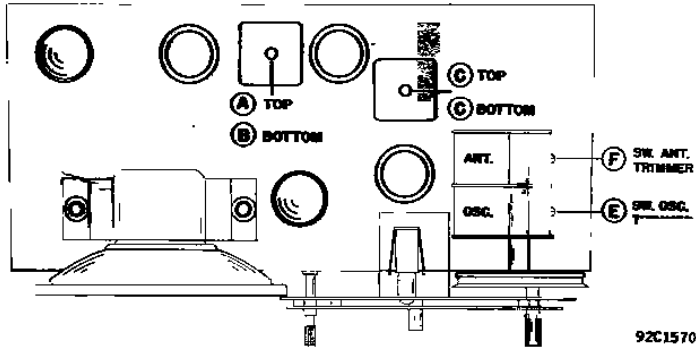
Top View of Chassis Showing Location of Alignment Adjustments
